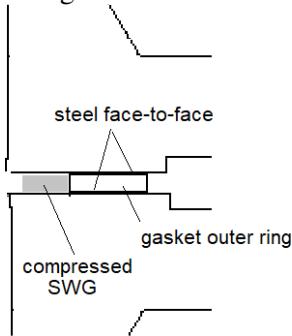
Fig. A – Outer steel ring, metal-to-metal contact after tightening.
